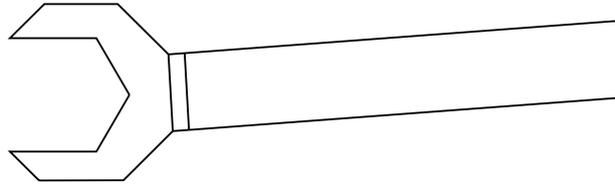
Tool: Glass insert wrench, standard accessory Part No. 221-46977
